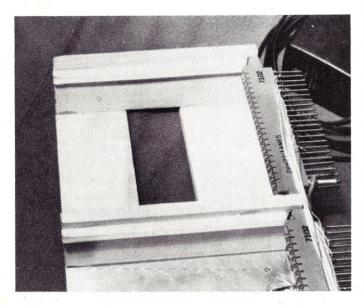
View of chassis construction. End piece is notched for connector lug, and holes are drilled to accommodate press-in lugs of the card guide.
